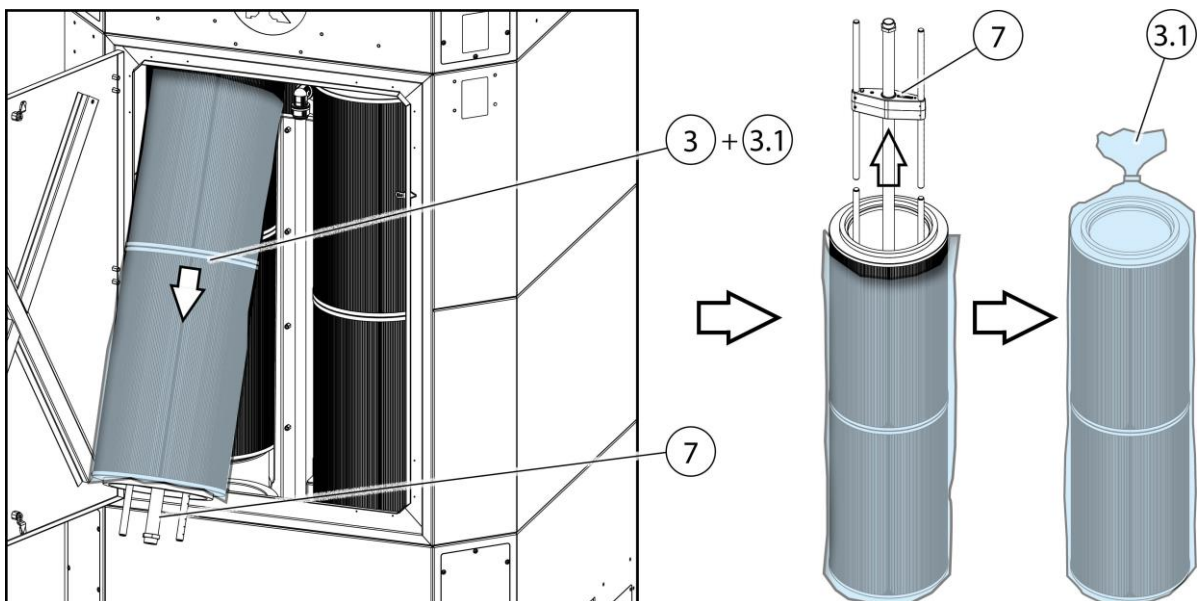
Changing filters – Removing the filter + rotating nozzle
